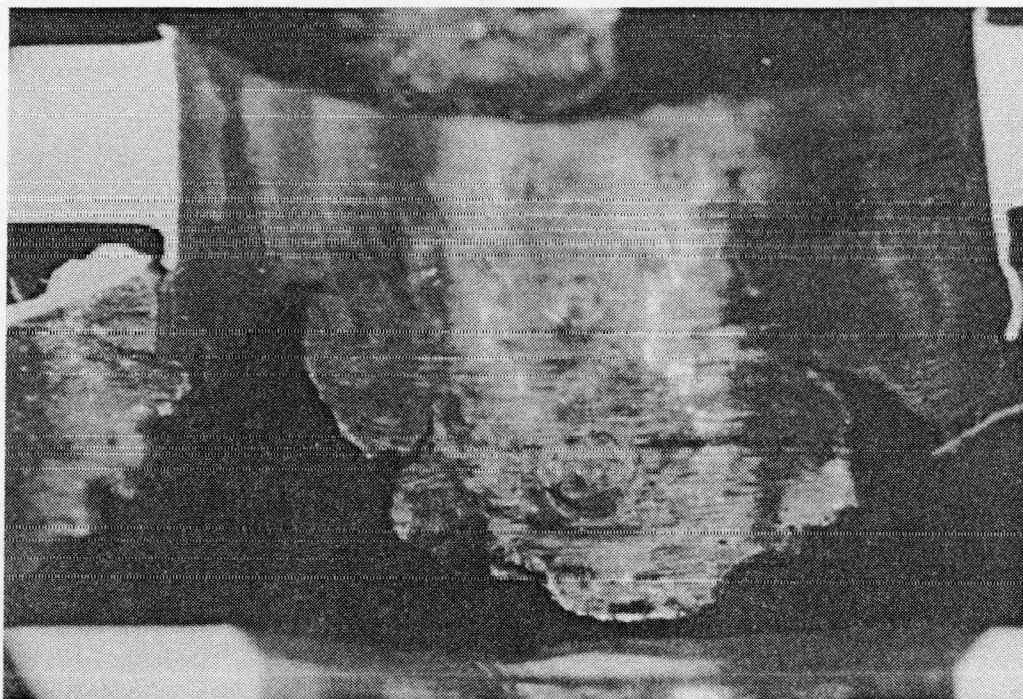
Cross Section of Ragged Drill-Exit Burr
